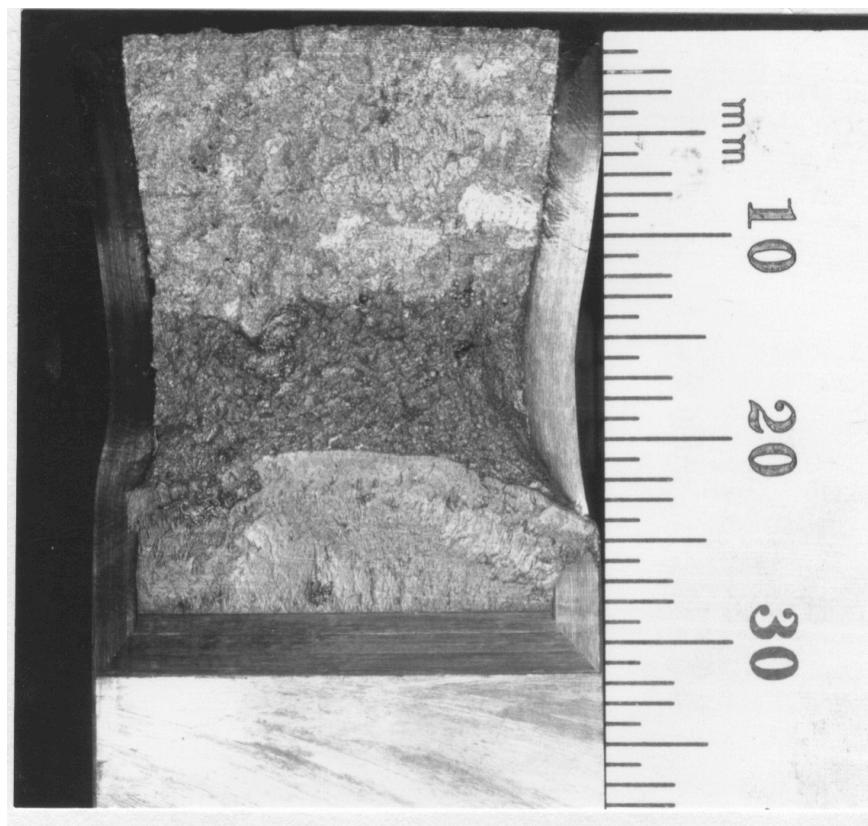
Fracture surface of the hot-leg main shutoff valve MA1 tested at 290°C after 13 y of service at 281°C
